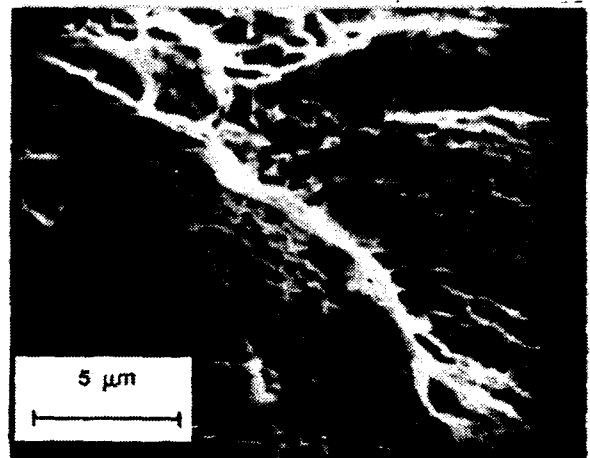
SEM of fracture surface #O-13e from Oahu failure.
